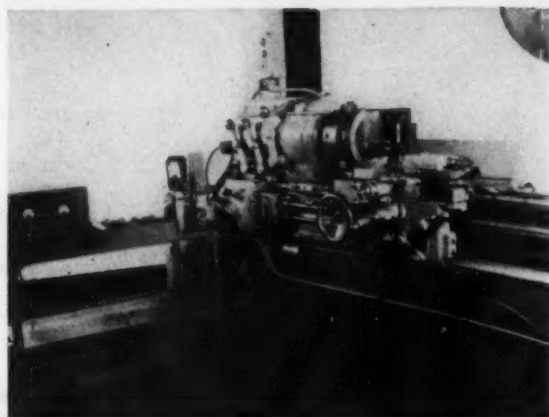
Machinability tests were made on the gray cast iron rings in a 14-in. engine lathe equipped with a peripheral chuck.
